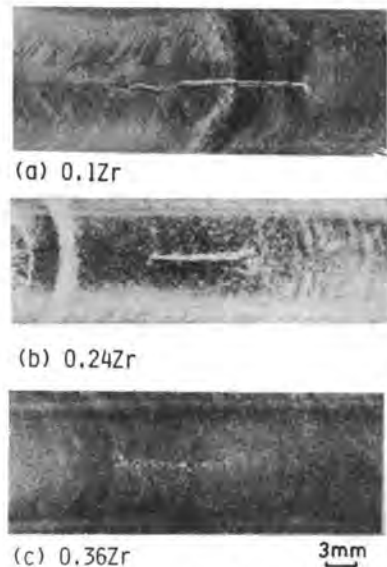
Appearance of weld bead showing crack-ing; 0.23 mm/sec tensile speed, 0.7 mm displacement
